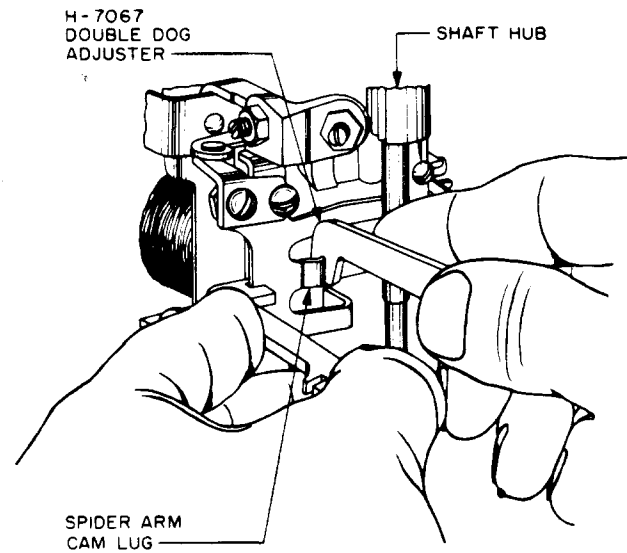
Method of Adjusting the Clearance Between the Spider Arm Cam Lug and the Shaft Hub
